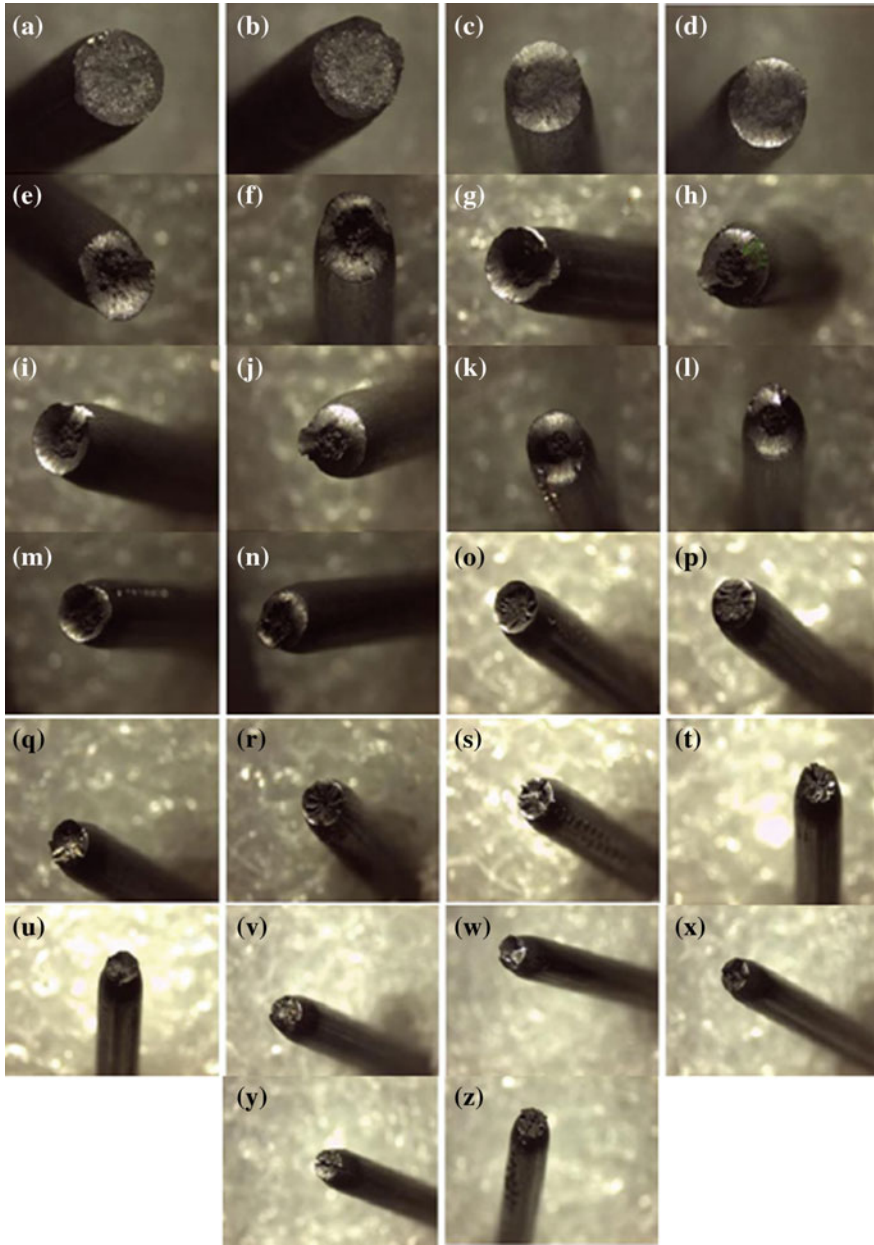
The stereomicroscopic images of fracture surfaces after torsion test for pass schedule-2
